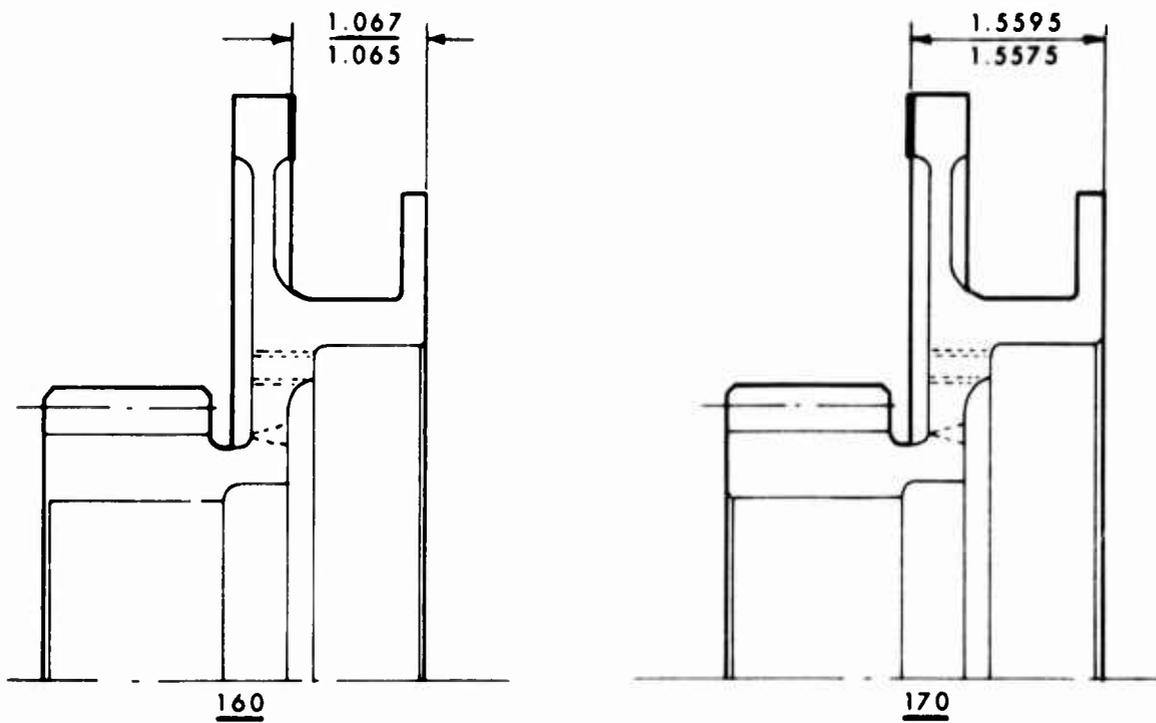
RG351-11278-045: Machine Operation Drawing (Sheet 2 of 2).
